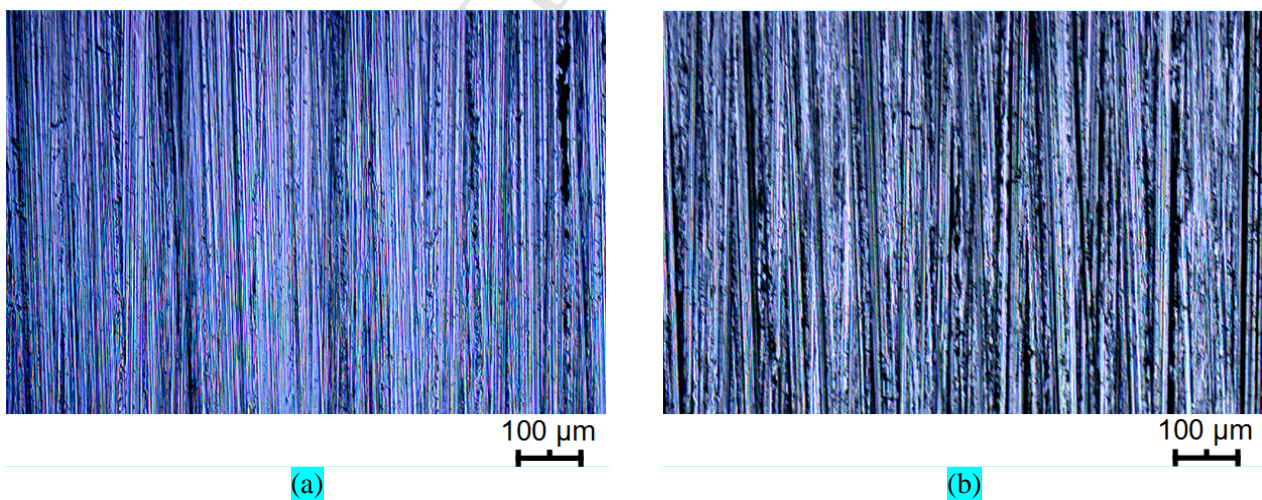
LSM surface characterization of workpiece after abrasive machining test using: (a) honing stone B151, and (b) LST cemented carbide tool.
